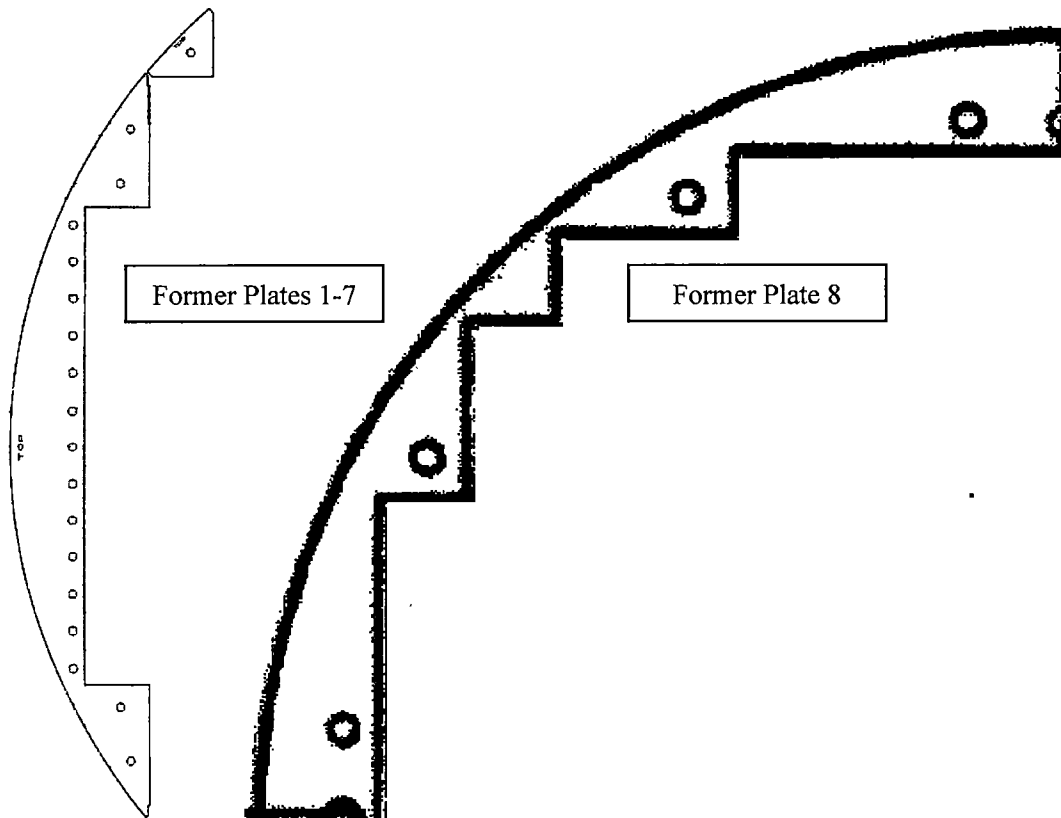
Westinghouse 4 Loop Converted Upflow Plant Former Plates
